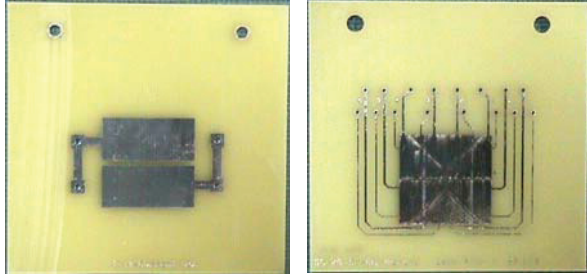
1-Inch Pad Test Boards for 2 and 8-Lead Devices
